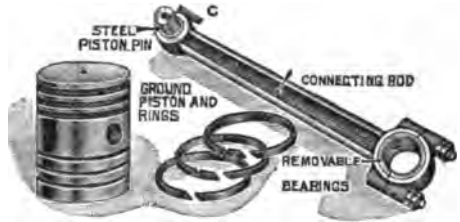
Piston pin oscillates in bushings in piston bosses. Note connecting rod is clamped to pin at C.
